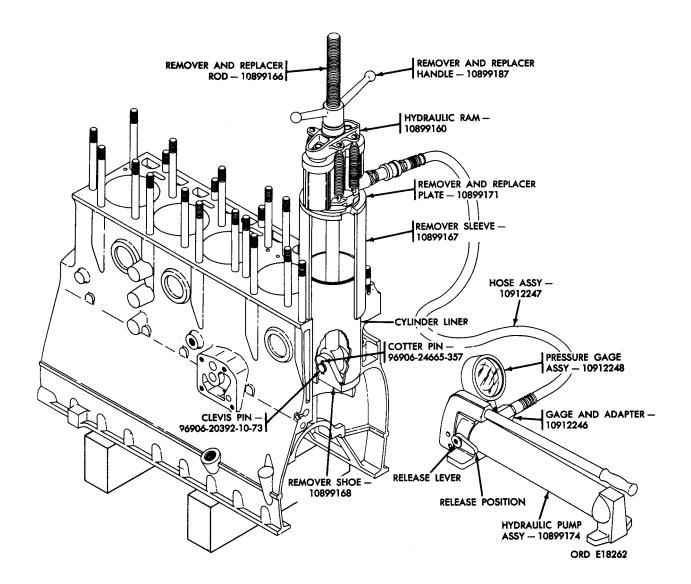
CYLINDER LINER REMOVER AND REPLACER KIT - 8722925 SHOWING POSITION OF SHOE AGAINST LINER DURING LINER REMOVAL - SECTIONAL VIEW.
